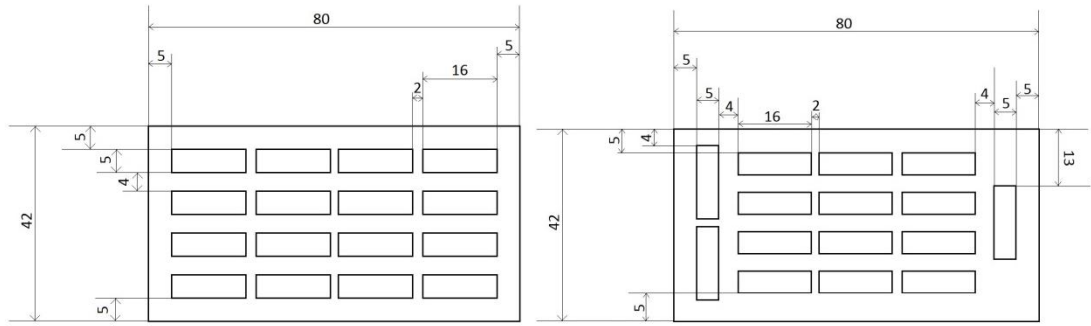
lower end design surface (Unit: mm) Figure 2-22: upper end design surface (Unit: mm)
